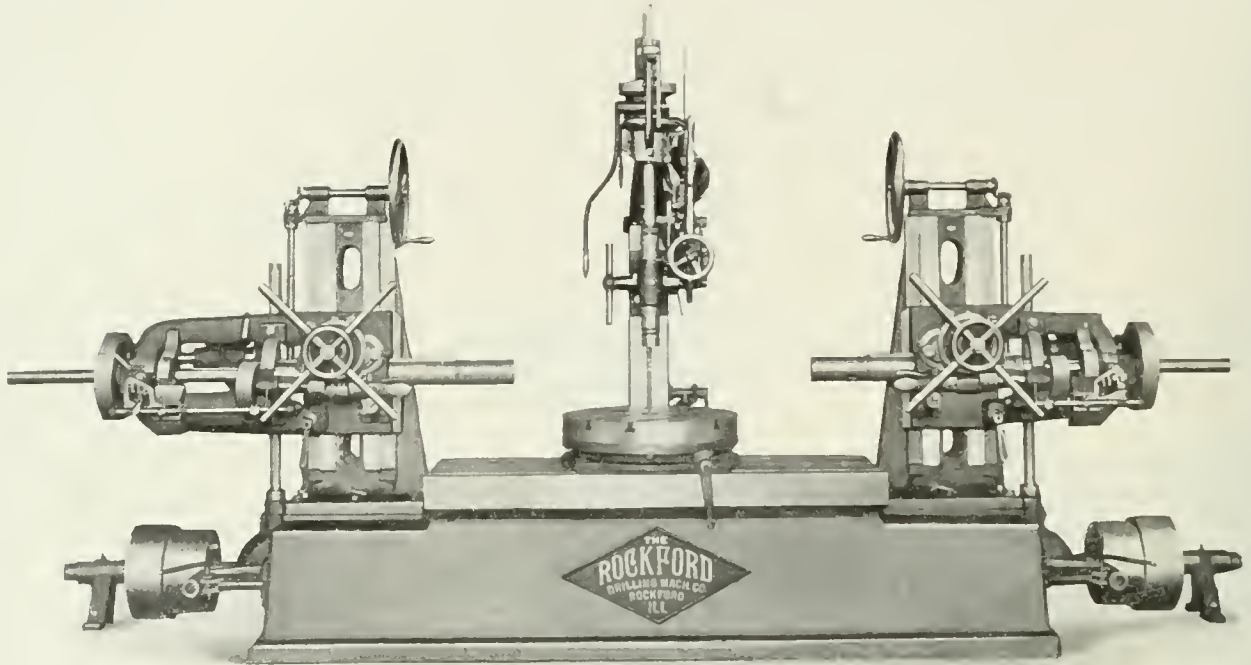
Boring Machine with Drill Presses for Drilling and Tapping Operations
